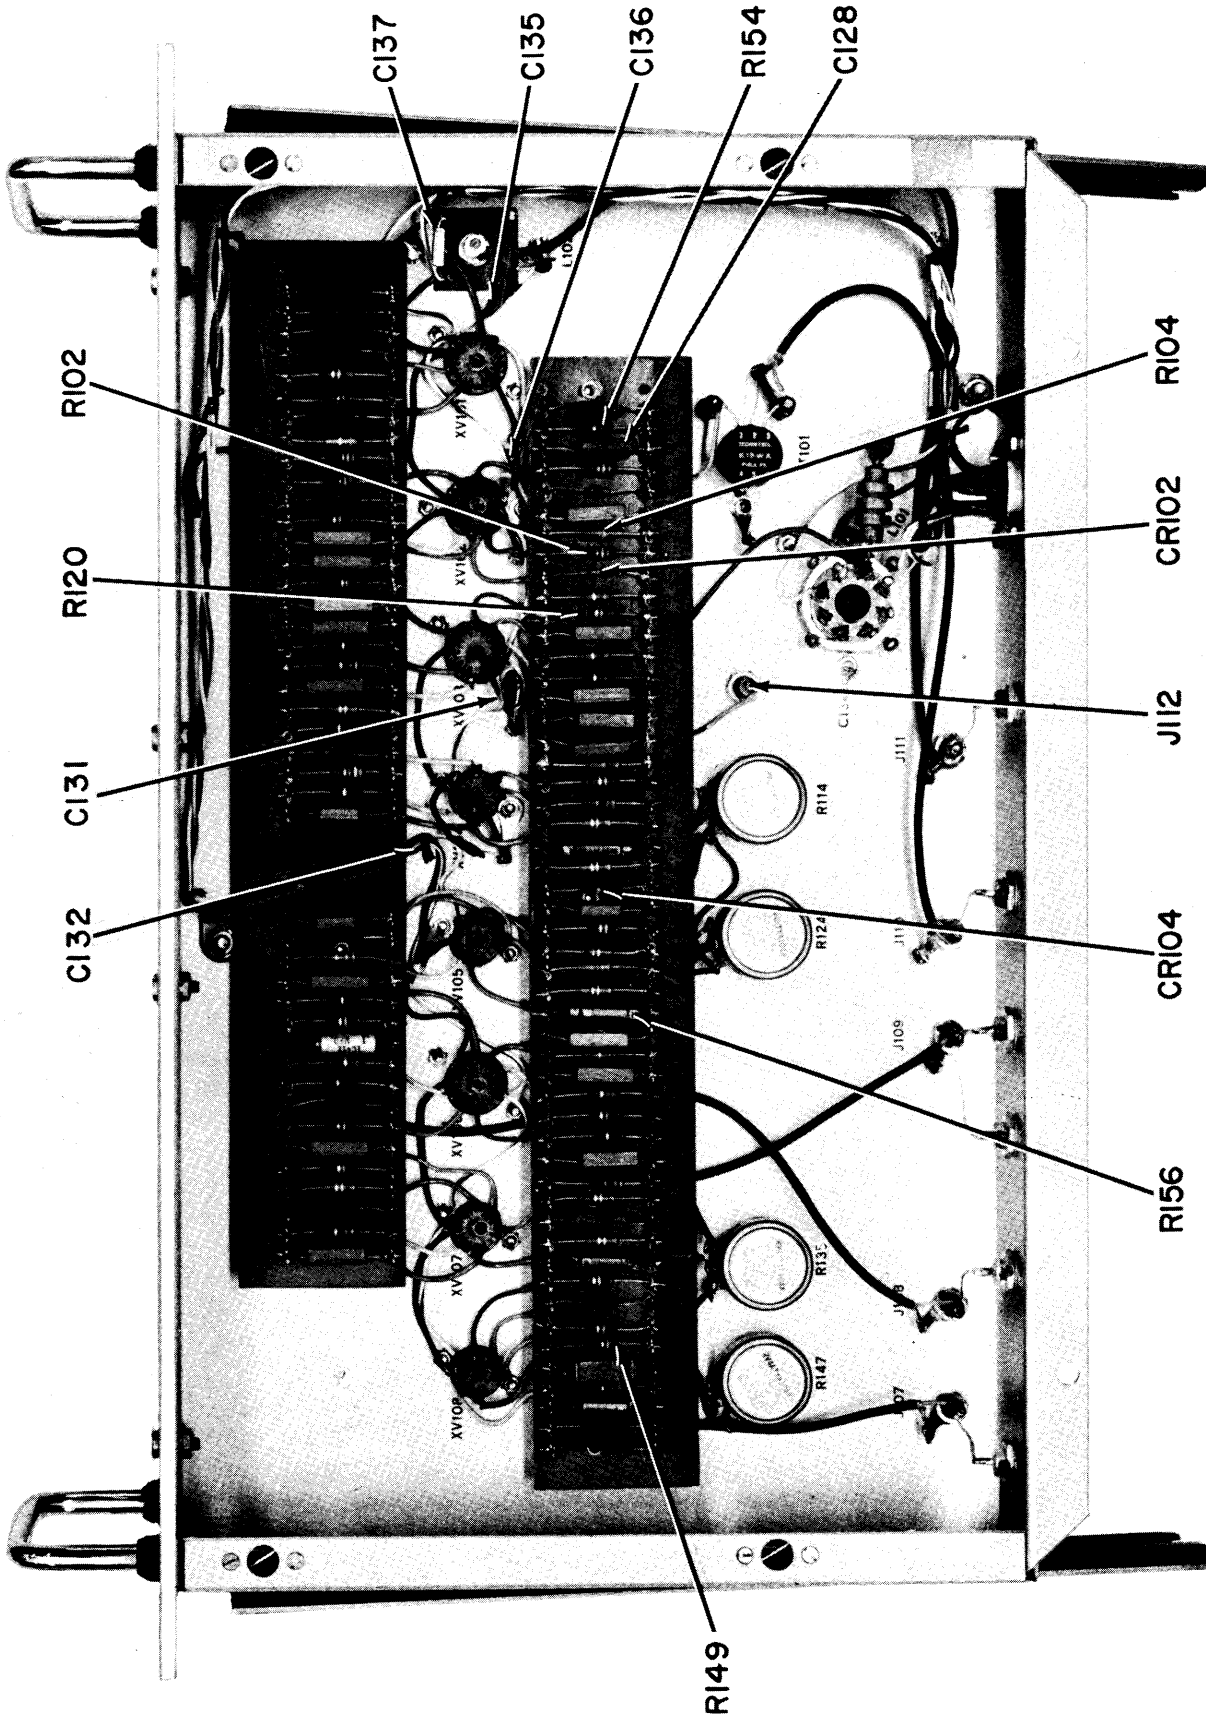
Location Diagram of Major Electronic Equipment Components, Bottom View
